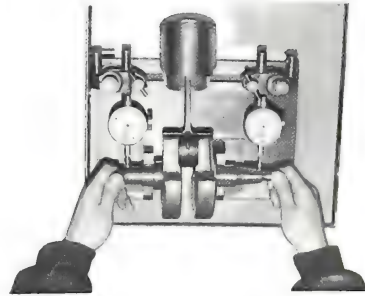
Inspecting crankshaft deflection
